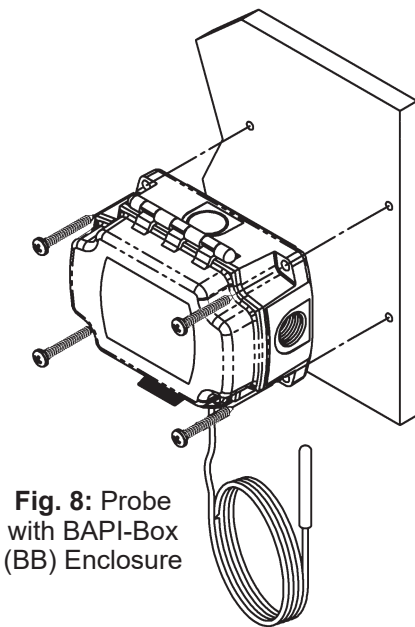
Probe with BAPI-Box (BB) Enclosure
